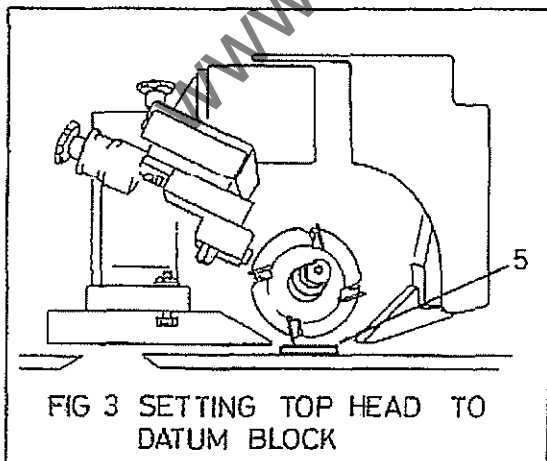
SETTING TOP HEAD TO DATUM BLOCK
